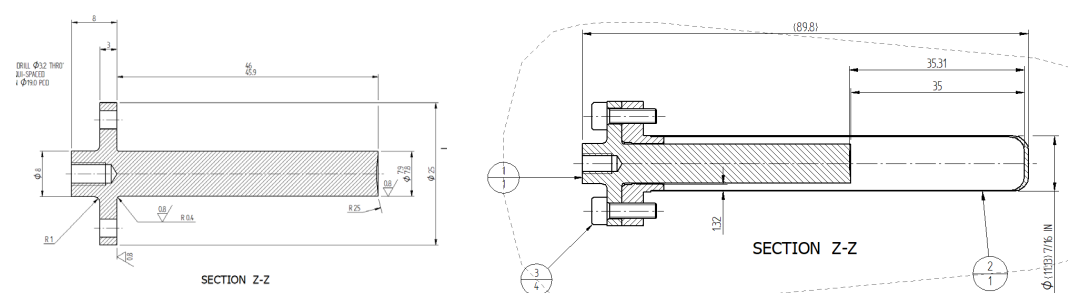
Bespoke stainless-steel lid (left) for the ISIS standard vanadium can and assembly (right) drawings.
